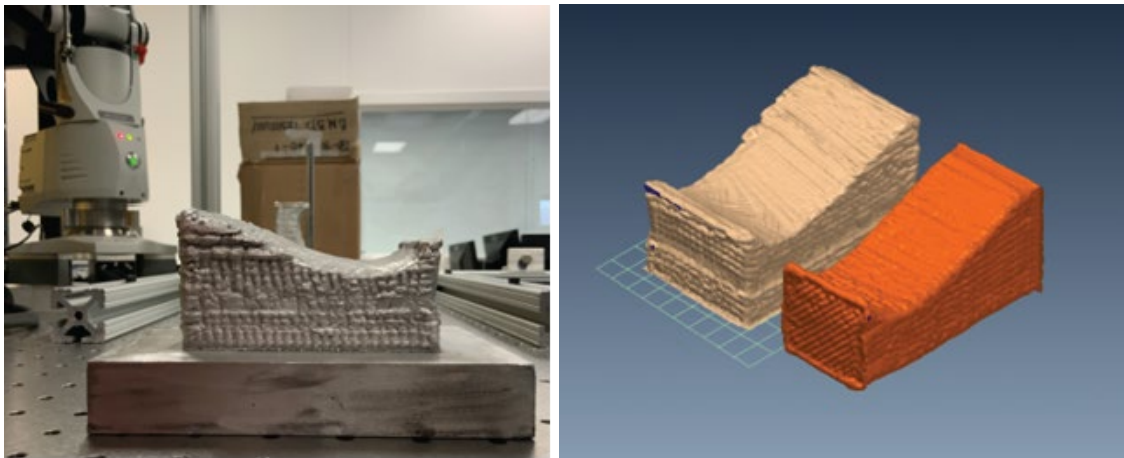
As-heat treated and unmachined 3D printed preliminary scaled-down mold (on the left) and laser scan of the of the two mold segments.
